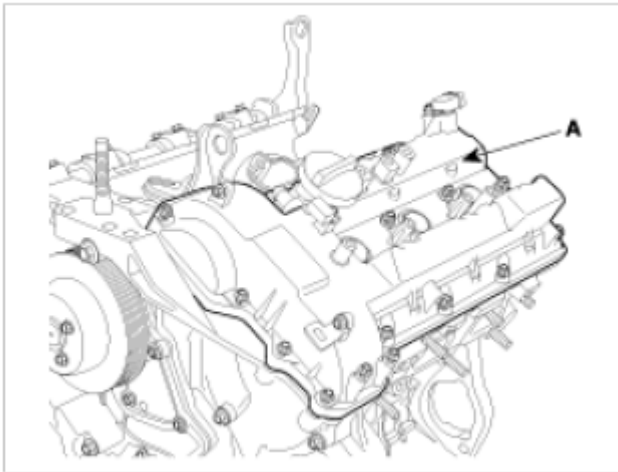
Identifying Cylinder Head Cover Connector Bracket
